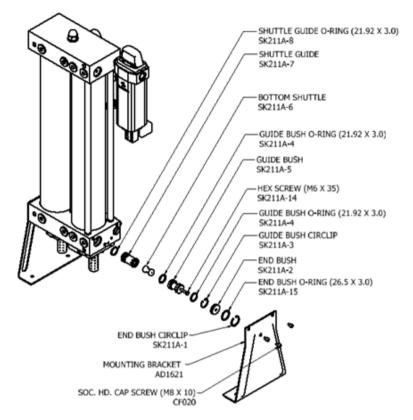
Exploded view of bottom shuttle-Dryspell Plus models 20 and 30
